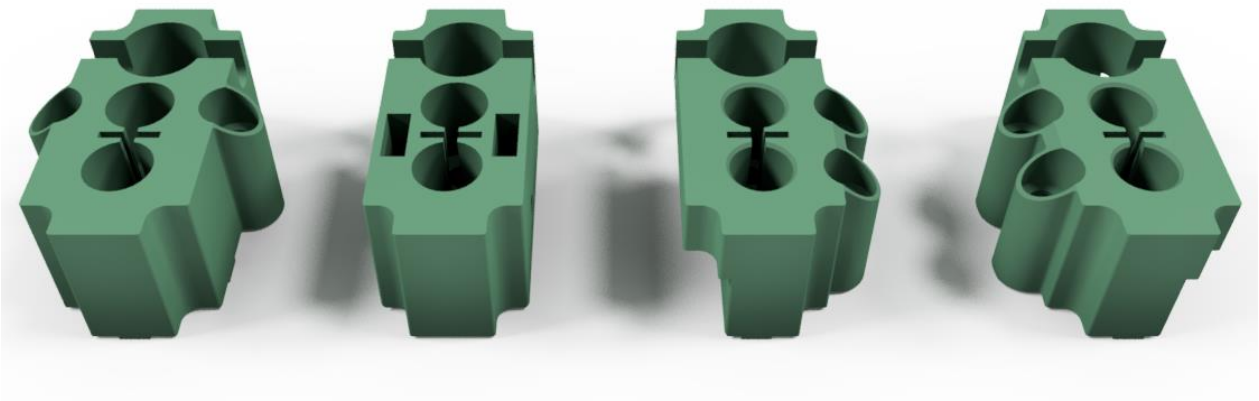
From Left to Right: Standard, Mid 2-wide C-Channel, Left Flange and Right Flange Motor Attachment Blocks
